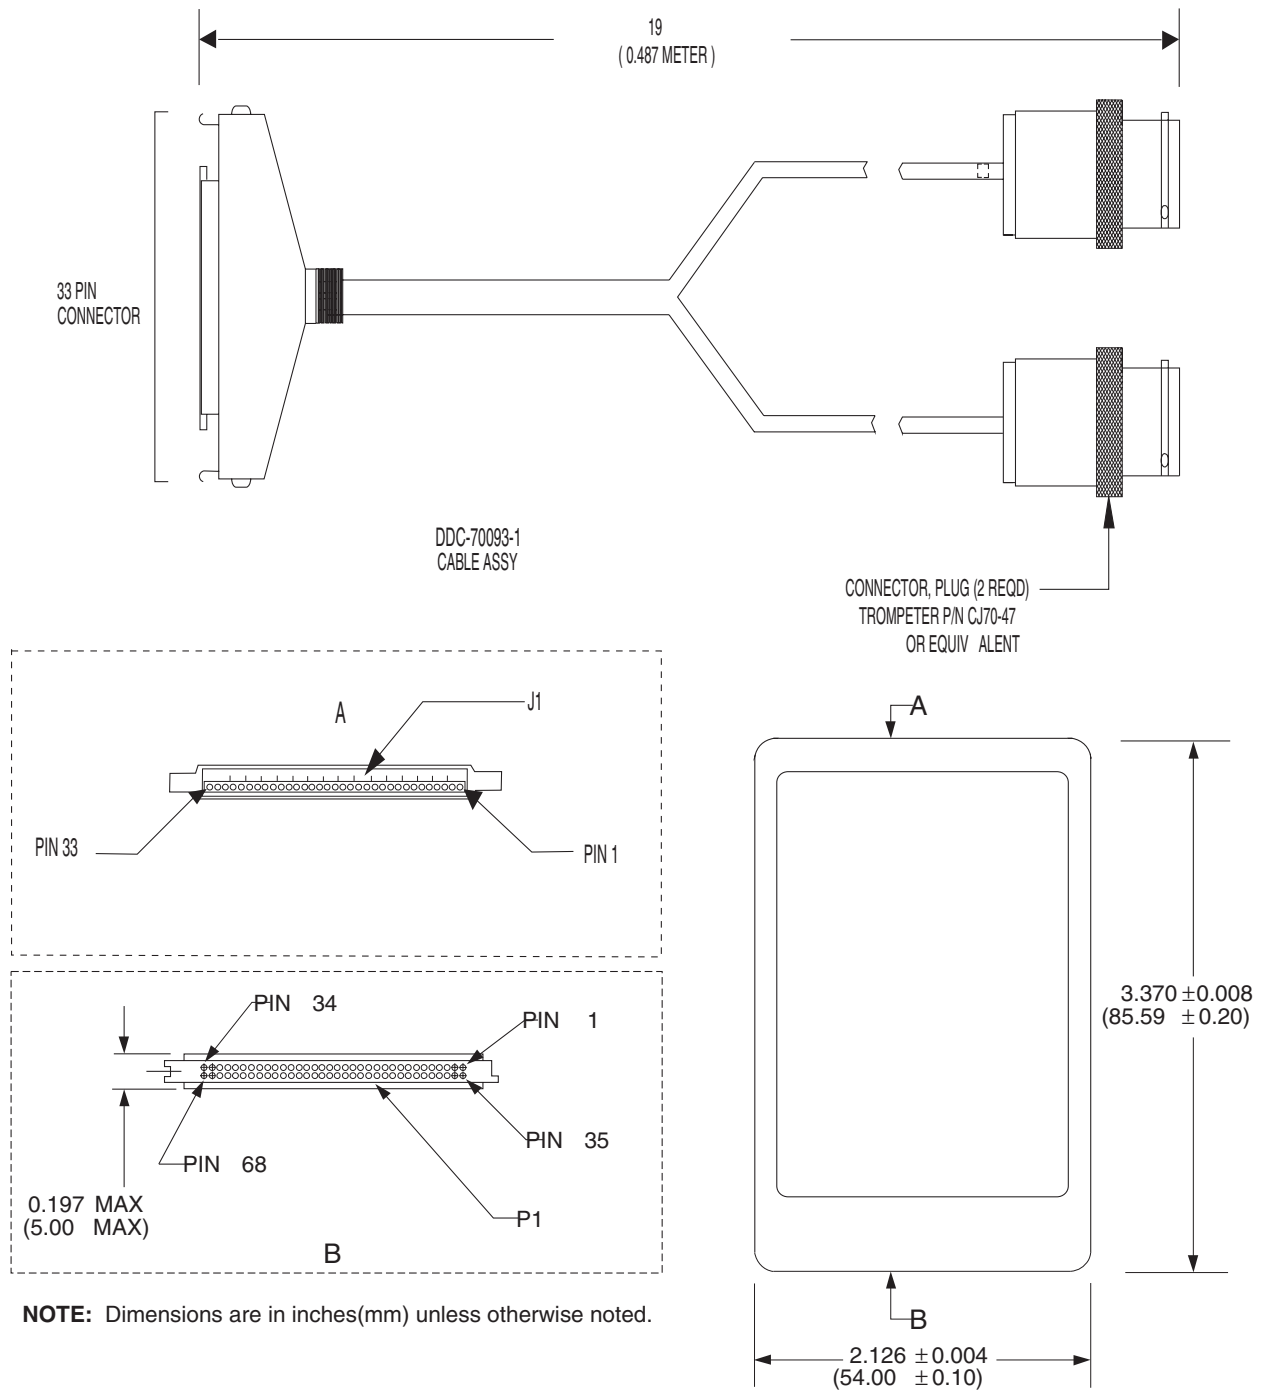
BU-65551 INTERFACE TO A MIL-STD-1553 BUS
